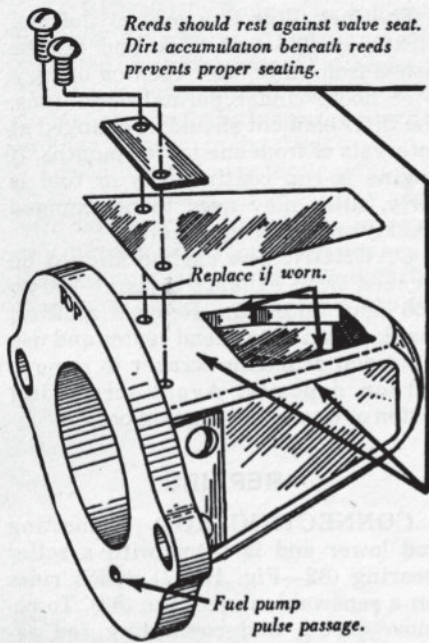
View showing reed valve assembly with one valve reed removed. Inspect seat and reeds as noted and be sure fuel pump pulse passage is open.
